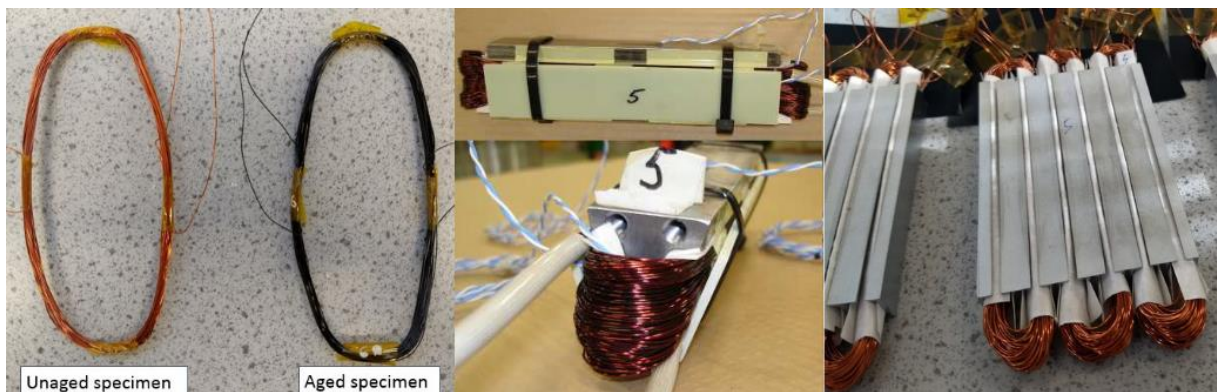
A range of low-voltage machine samples. From left to right, enamelled wire coils [106], windings on a single steel bar [66] and motorettes [127].
